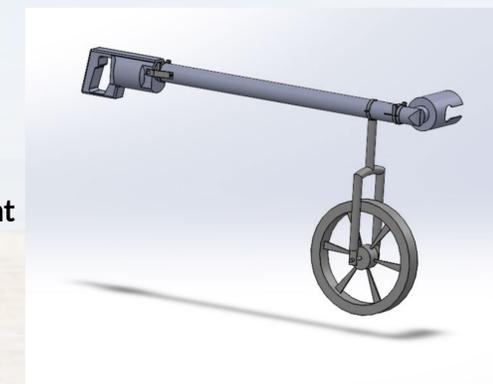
Cell Tarp Roller Drive prototype with wheeled mechanism installed.
